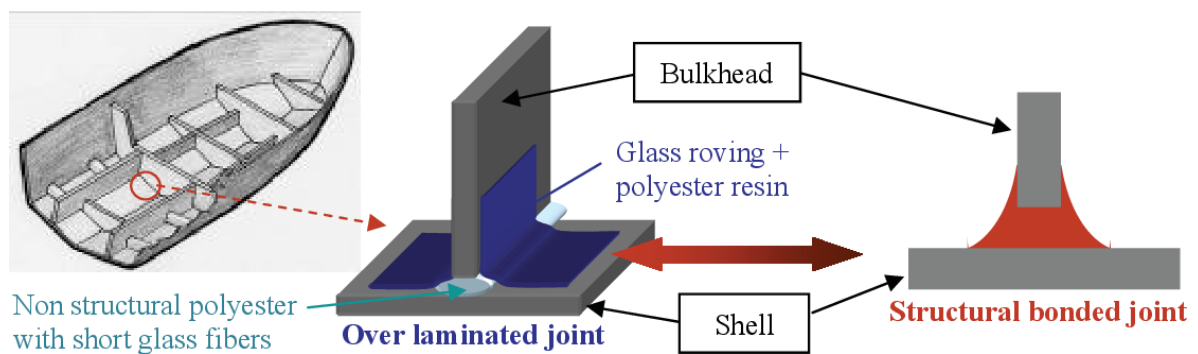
Structural junction between the shell and the bulkheads by overlamination and structural bonding
